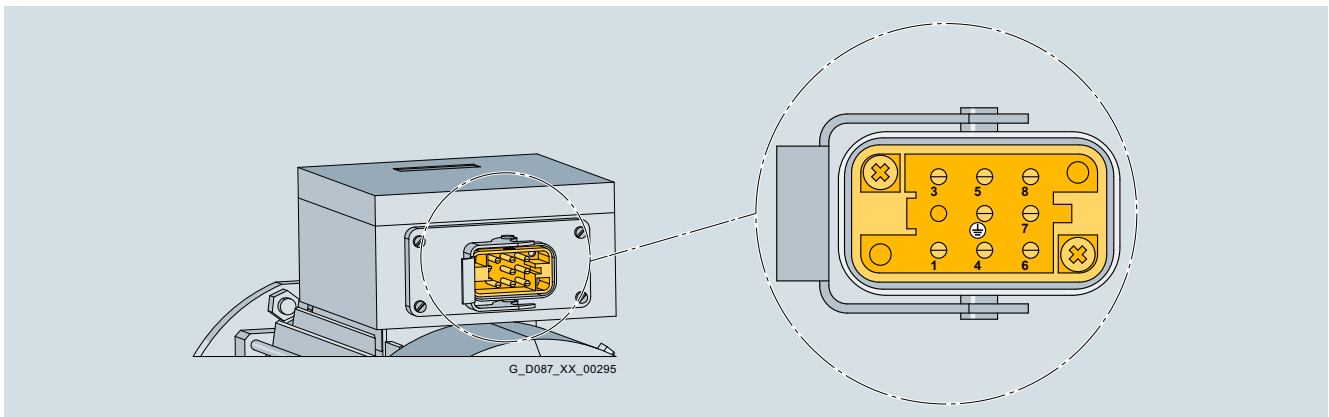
/22 HAN Q8 motor plug with pin assignments for motor frame sizes 80 to 132
